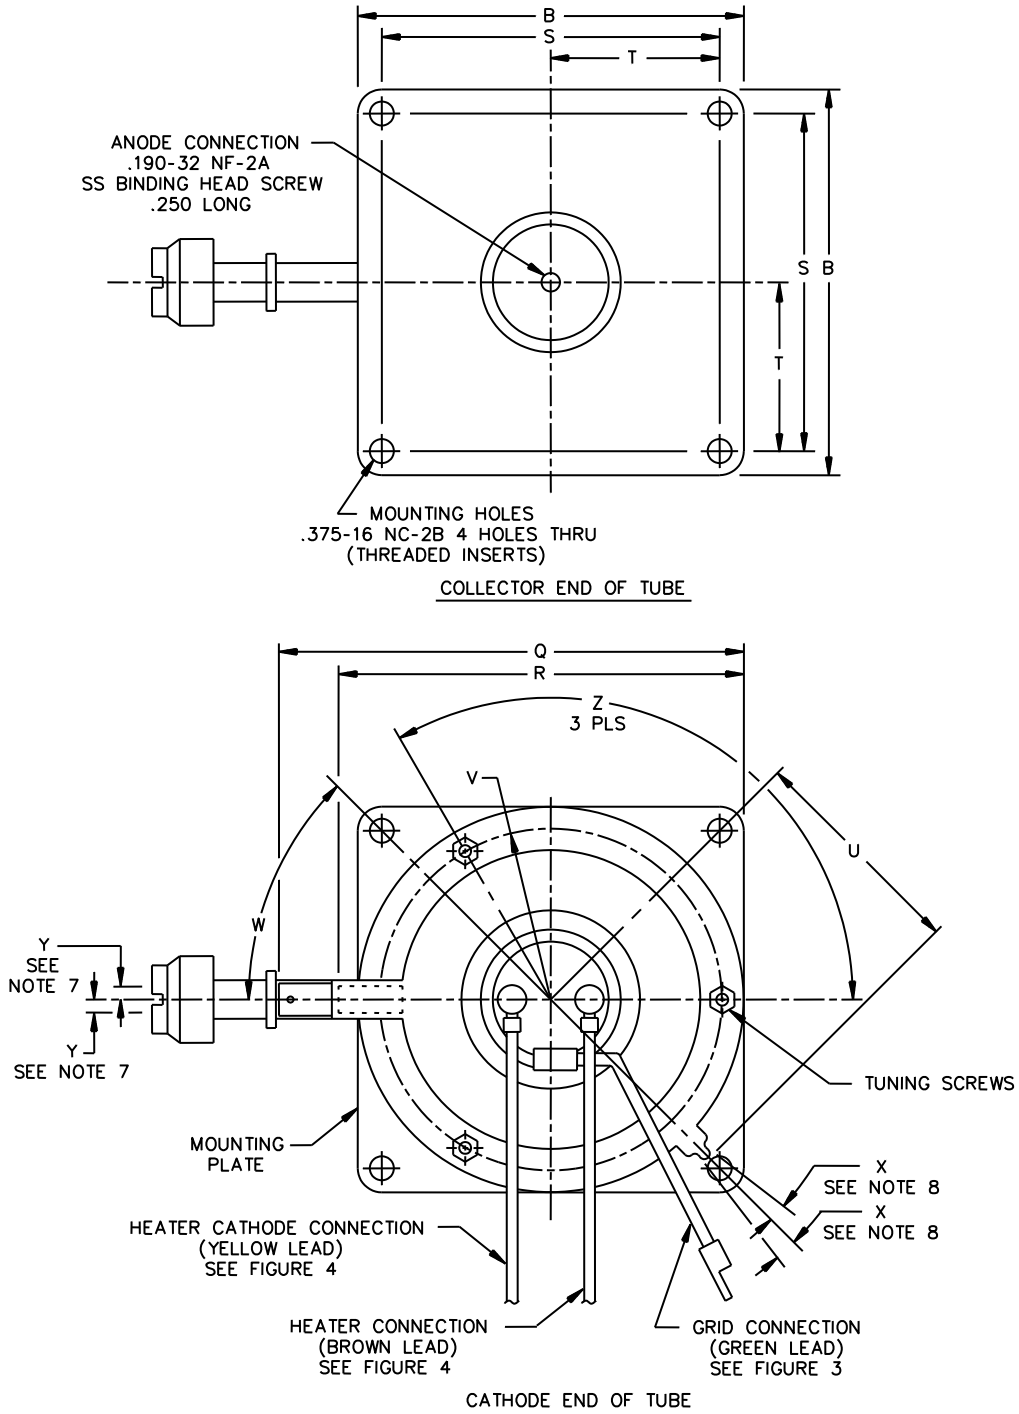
Outline drawing of electron tube type 8493 - Continued.
